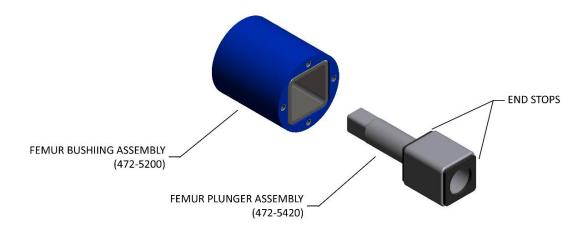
Femur Plunger Assembly Installed into Femur Bushing Assembly
